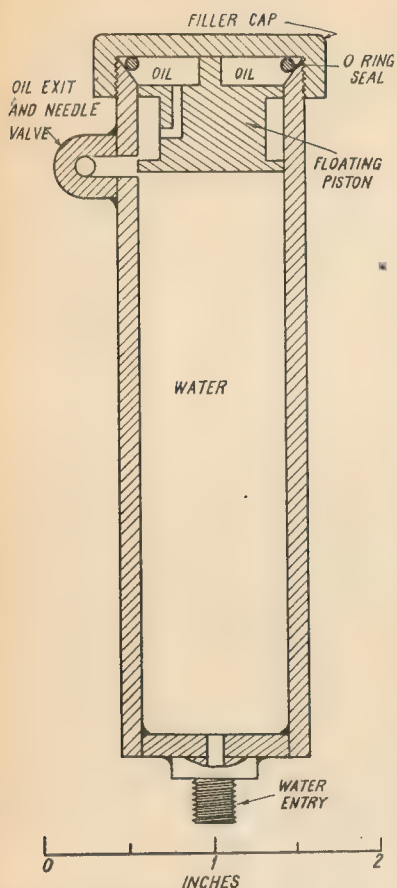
Modified Pilliner-type lubricator. Sketch shows lubricator empty and bypassing water to engine
